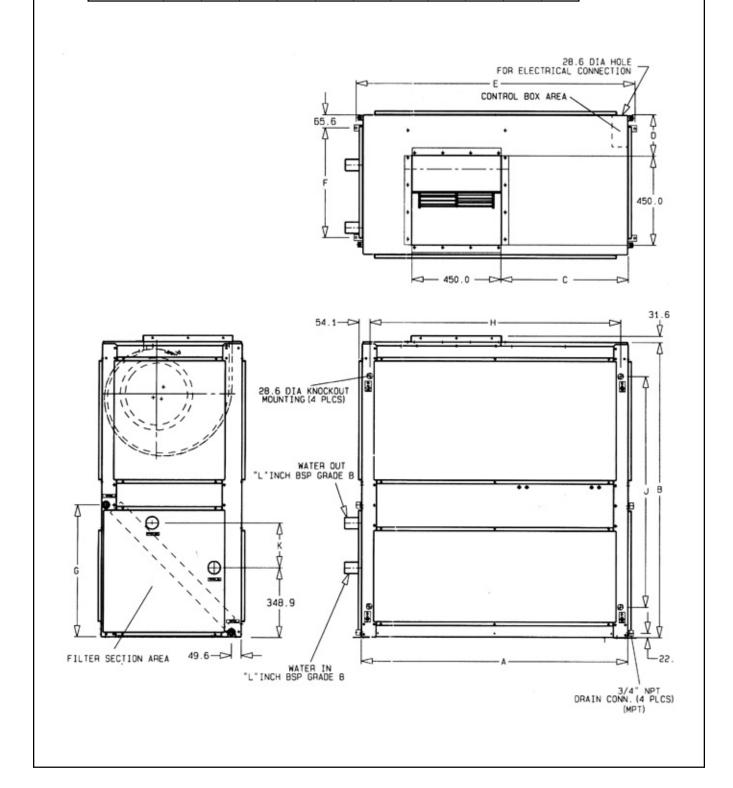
40LM150 & 200 DIMENSIONAL DRAWING
